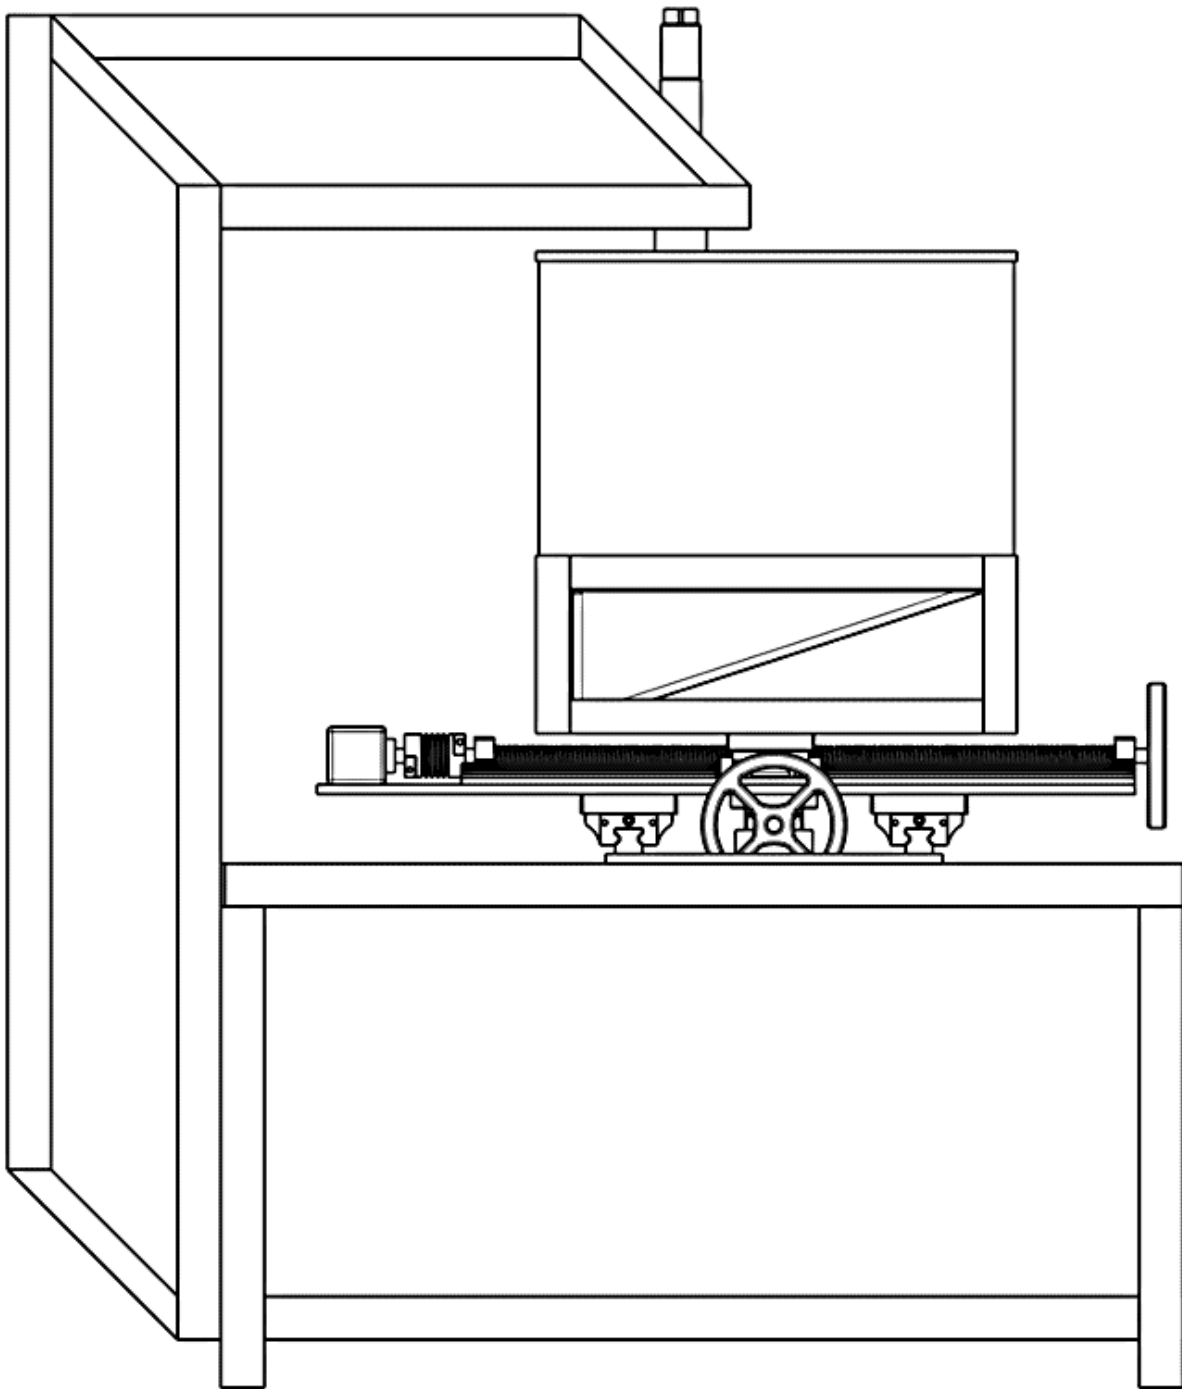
SIDE VIEW OF WHOLE ASSEMBLY
